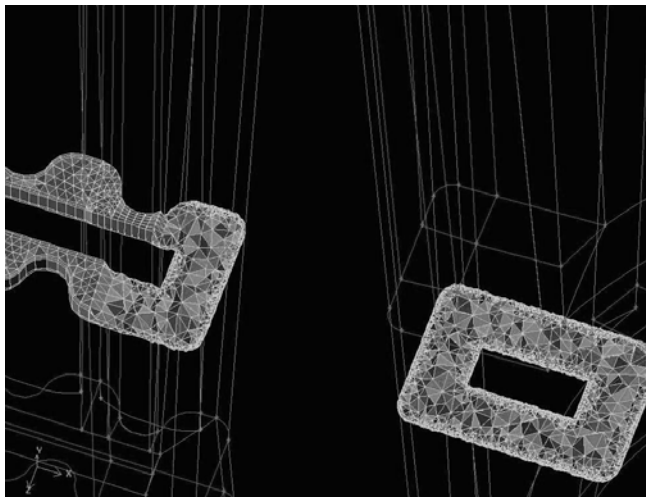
Geometry of the model of the 4 section heat exchanger assembly
